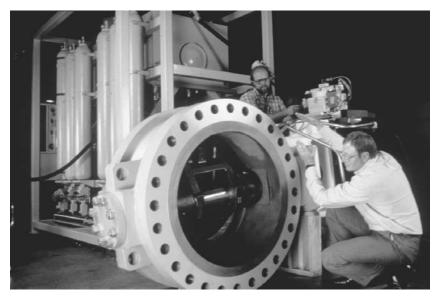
Flanged butterfly control valve. (Courtesy of Valtek International)
